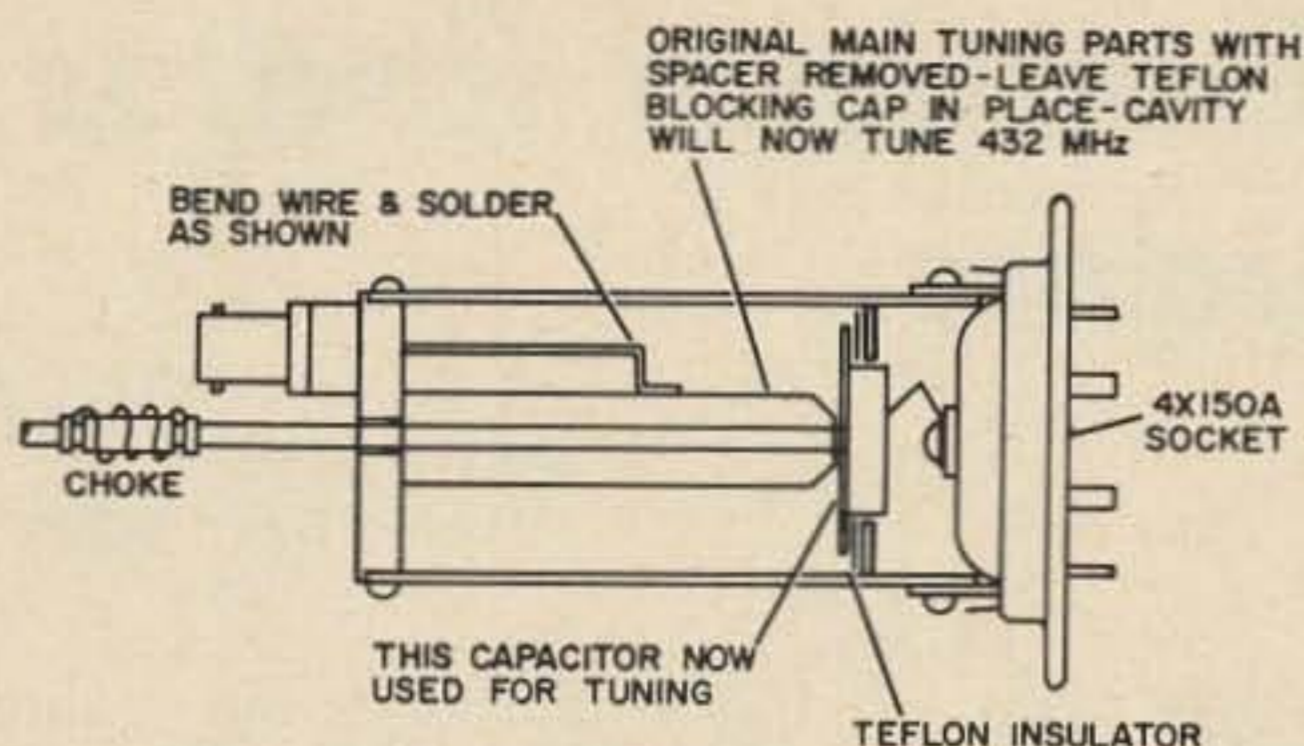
Grid cavity modifications. The original main tuning parts are removed.
